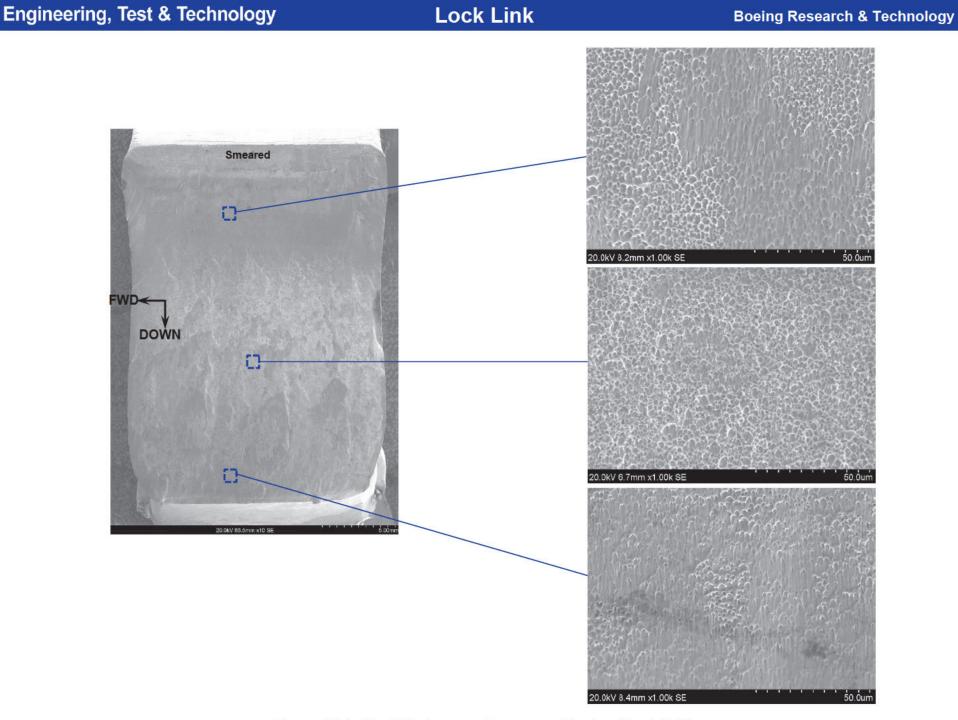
and 81. Close-ups of fracture surfaces [Lower Lock Link]
